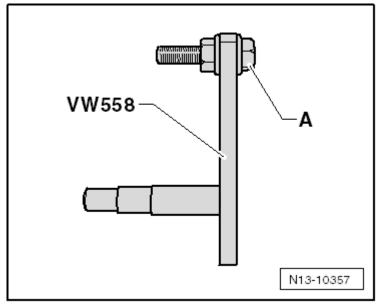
Identifying Flywheel Lock Adapter -VW 558- And Bolt Courtesy of VOLKSWAGEN UNITED STATES, INC.
